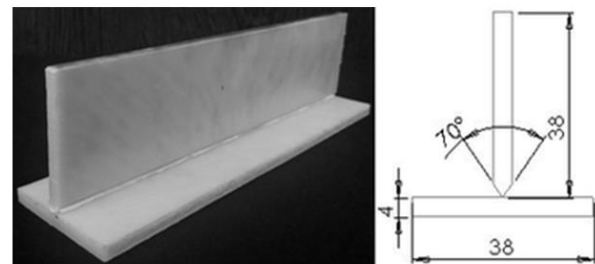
The welded sample in T joint geometry and schematic of sample used for strength test
